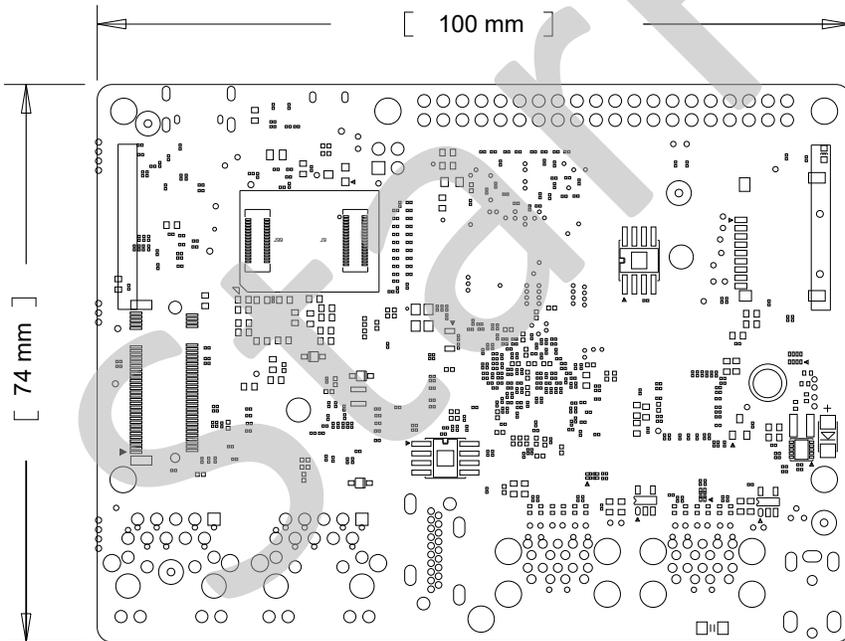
VisionFive 2 Mechanical Drawing (Bottom View)
